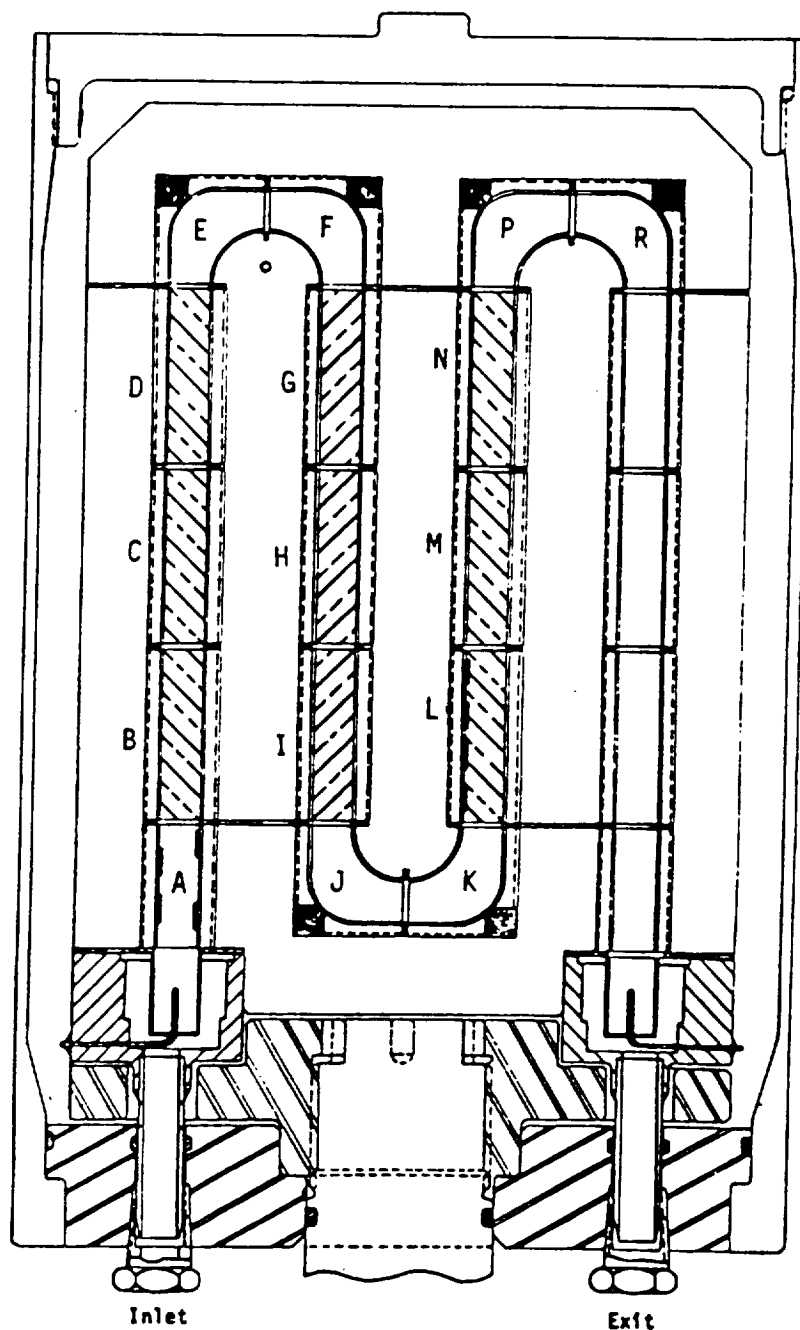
Cross Sectional View of Coolant Passage Heat Transfer Model Assembly With Skewed Trip Rough Walls
